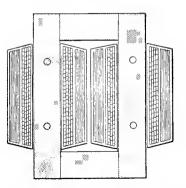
Cross-section of coils and core of transformer shown in Fig. 93. (Section in plane of stampings.)
